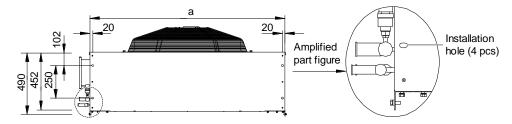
Mounting base dimensions for vertical installation (top view) (unit: mm)
